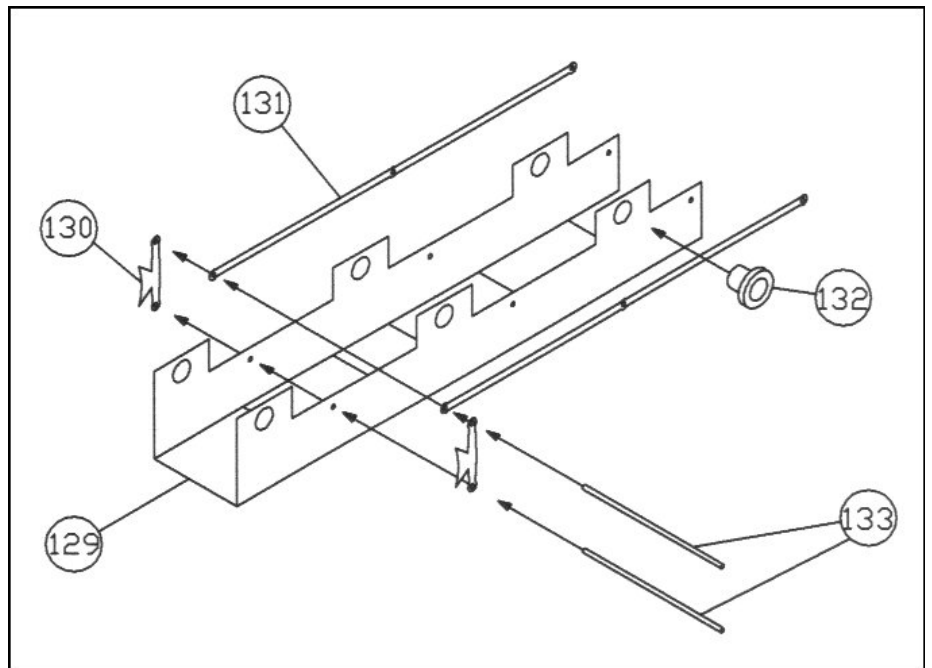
MAIN CHASSIS CONSTRUCTION.
